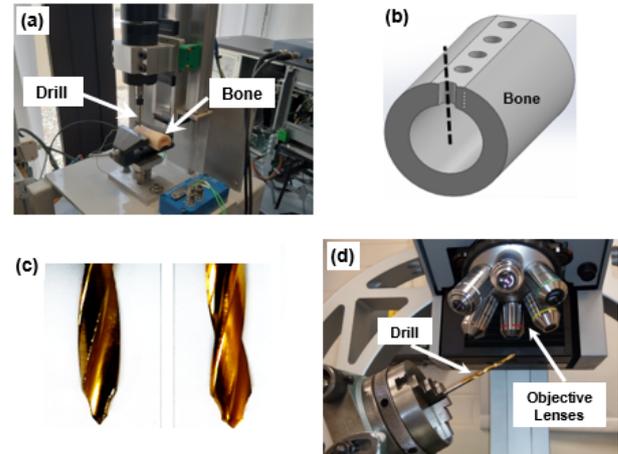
(a) bone drilling system with necessary attachment for force and temperature measurements, (b) bone specimen for drilling, (c) surgical drills, (d) surface roughness measurement system for drills.
